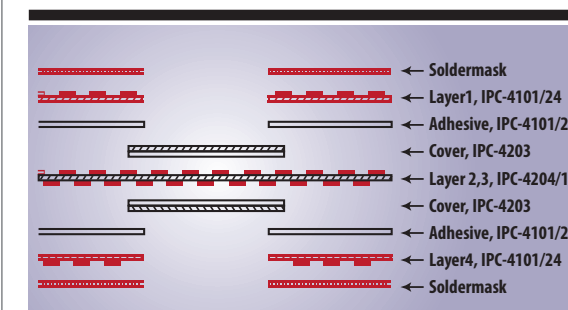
A well-defined cross section similar to the one above should be included on the fabrication drawing.
